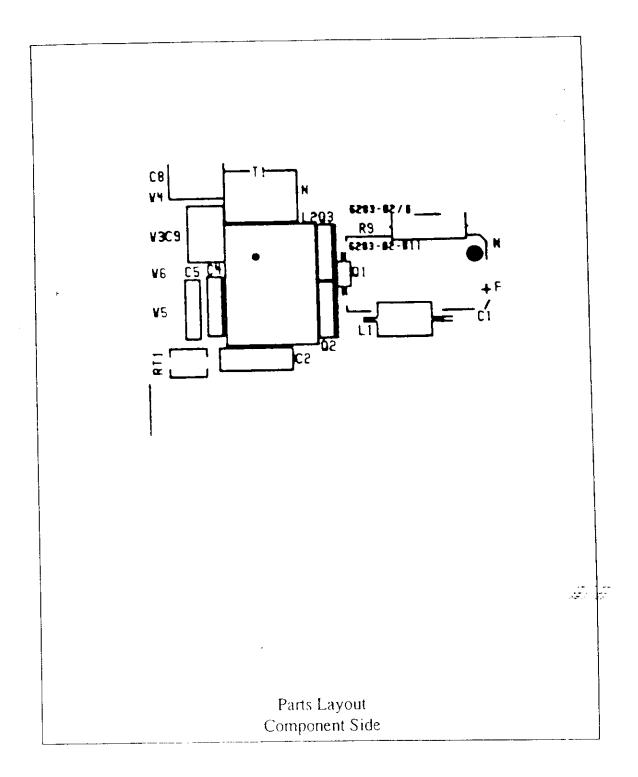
Parts layout drawings of the Mini-Lynx 20W/728
